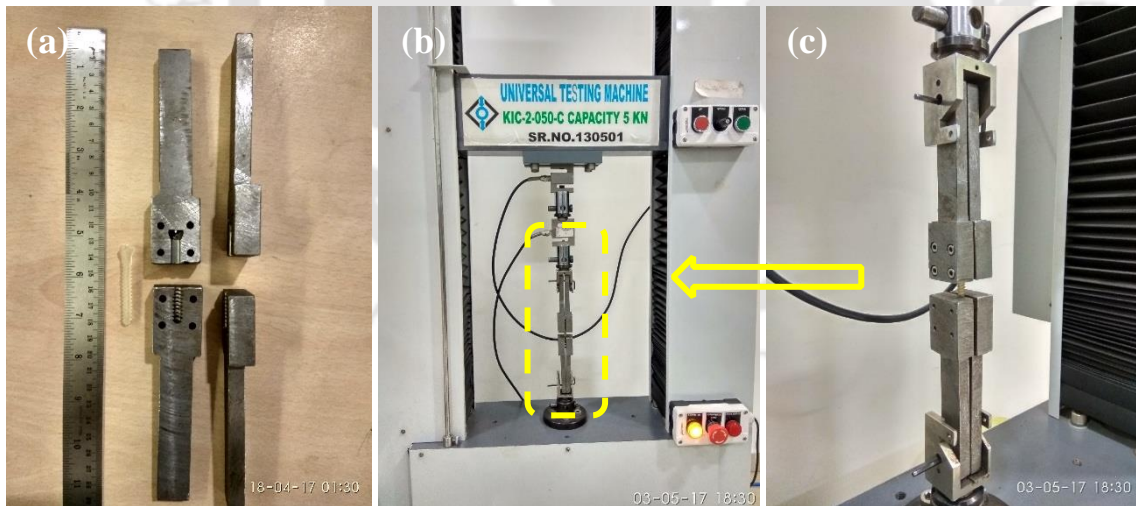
(a) Fixture for cortical screws (b) fixture setup (c) magnified the view of axial pull out test arrangement.
